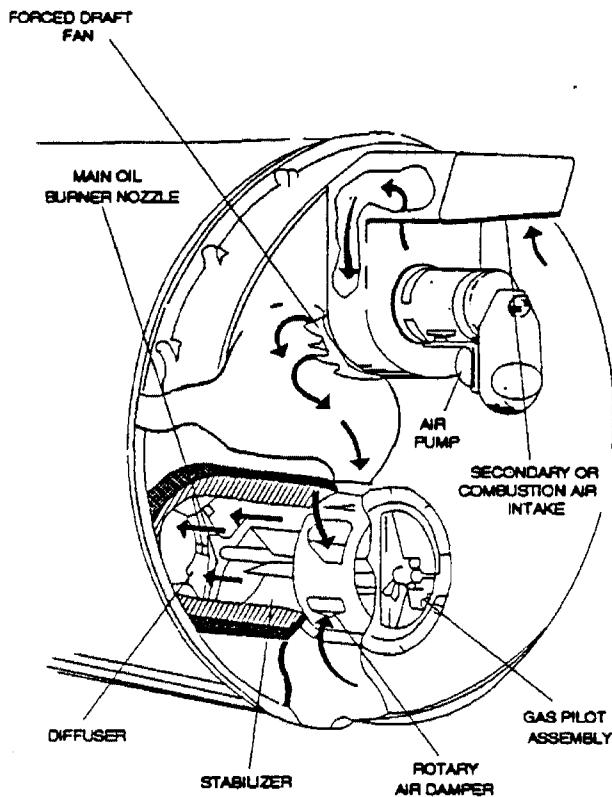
/ OIL HEATING ASSEMBLY (STEAM)]
